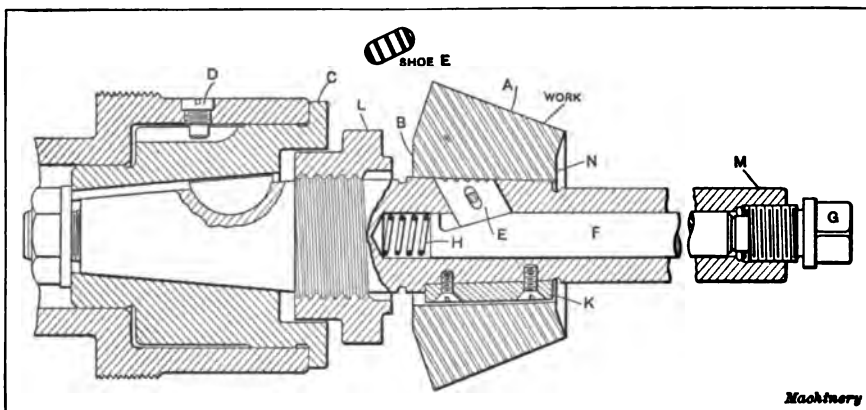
Arbor having Adjustable Shoe E bearing against Taper Bore of Pinion Blank
